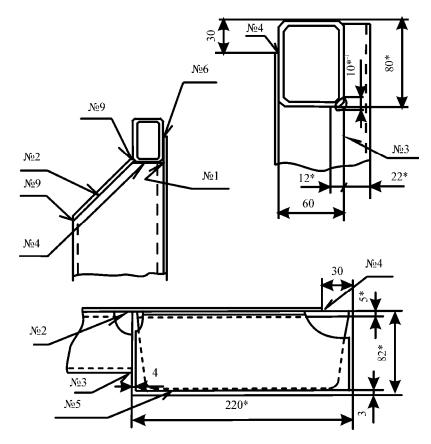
Welded container sidewall nodes, welded with forced cooling by CPE
